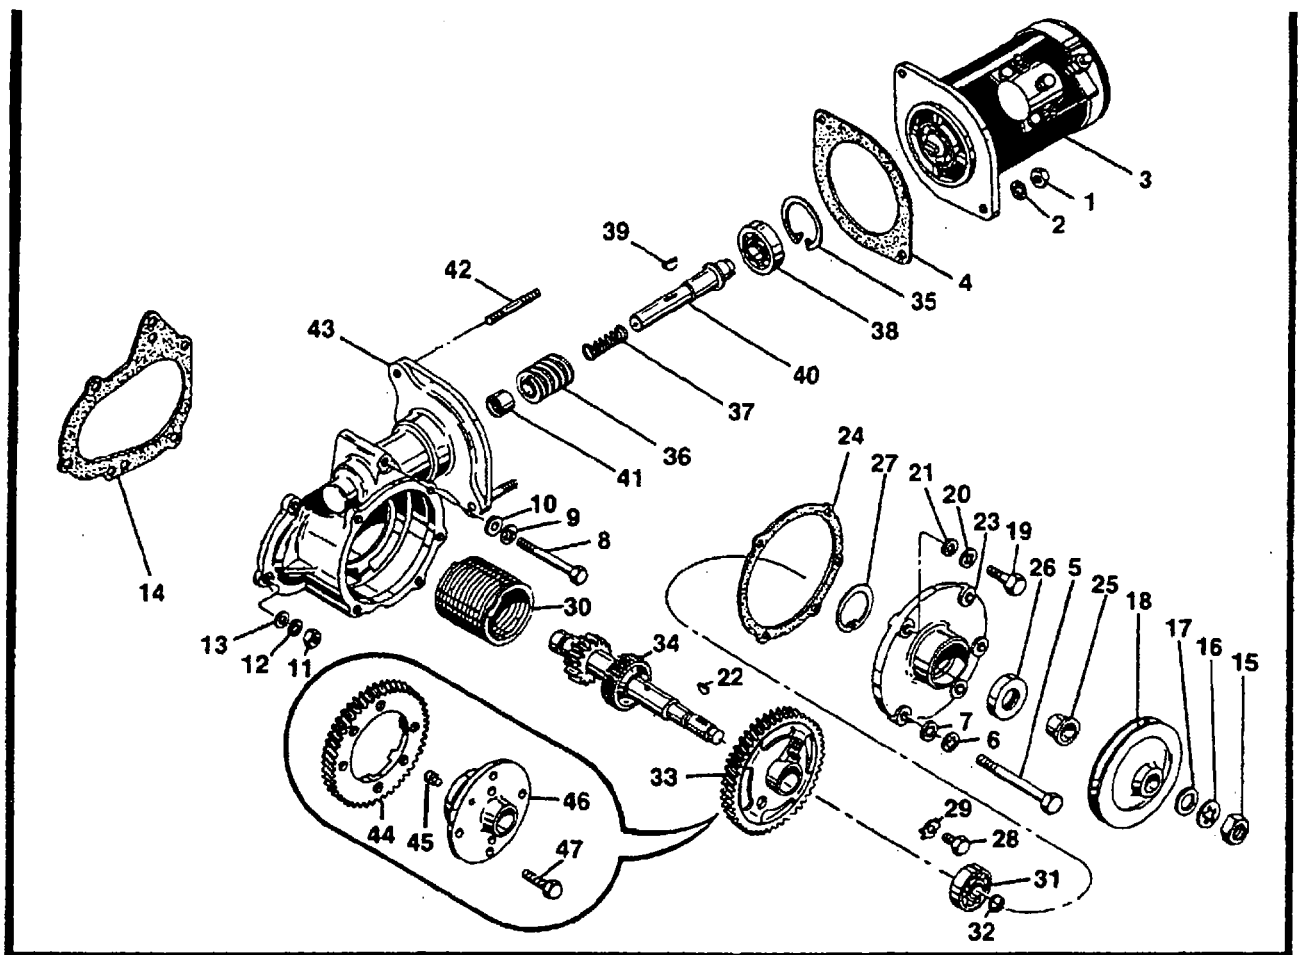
EXPLODED VIEW OF STARTER AND DRIVE ADAPTER.
